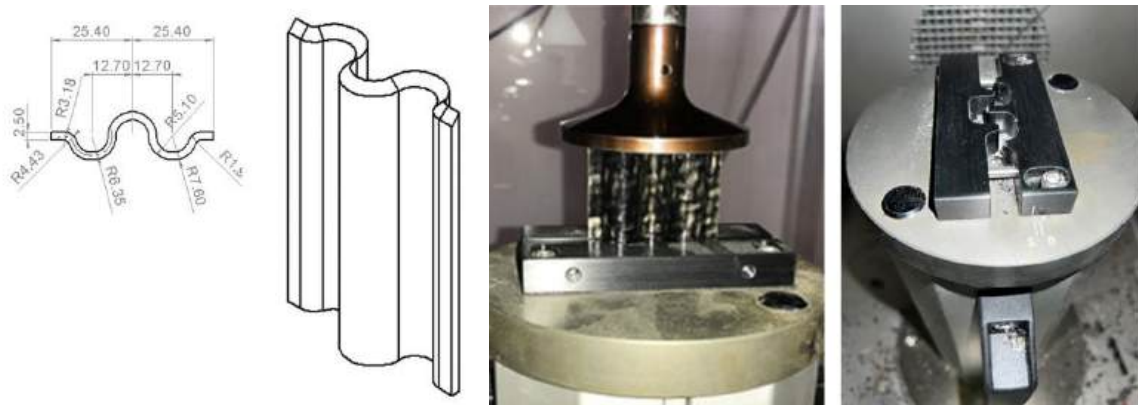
Corrugated shape: a) geometric scheme, and b) testing fixture equipment.
